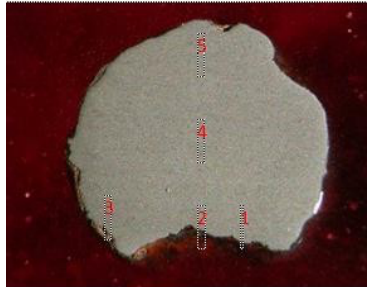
Location of Corroded Spring Cross Section Hardness Test
